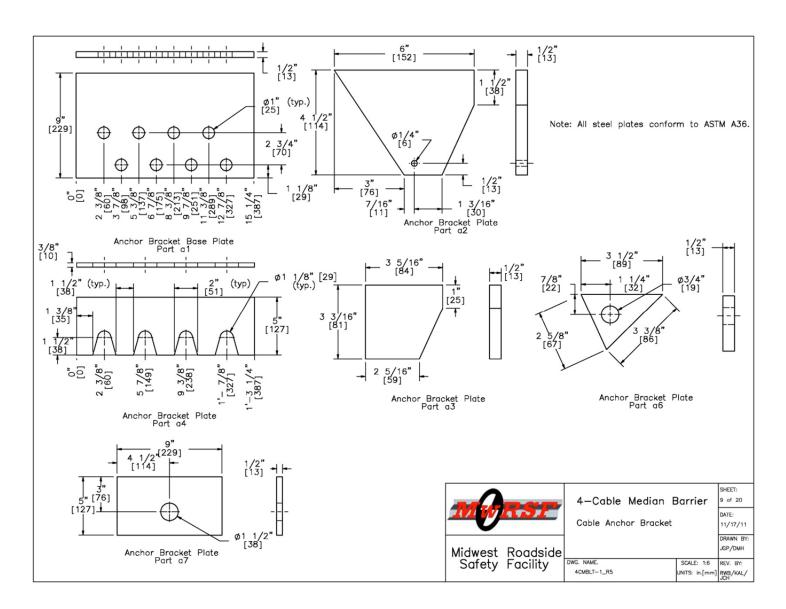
Anchor Bracket Details, Test No. 4CMBLT-1
